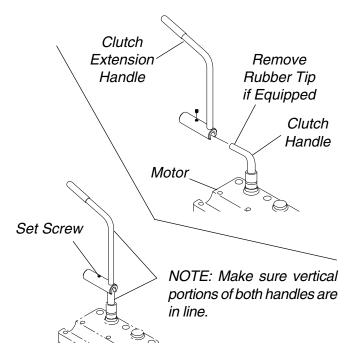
INSTALLING OPTIONAL CLUTCH EXTENSION HANDLES
